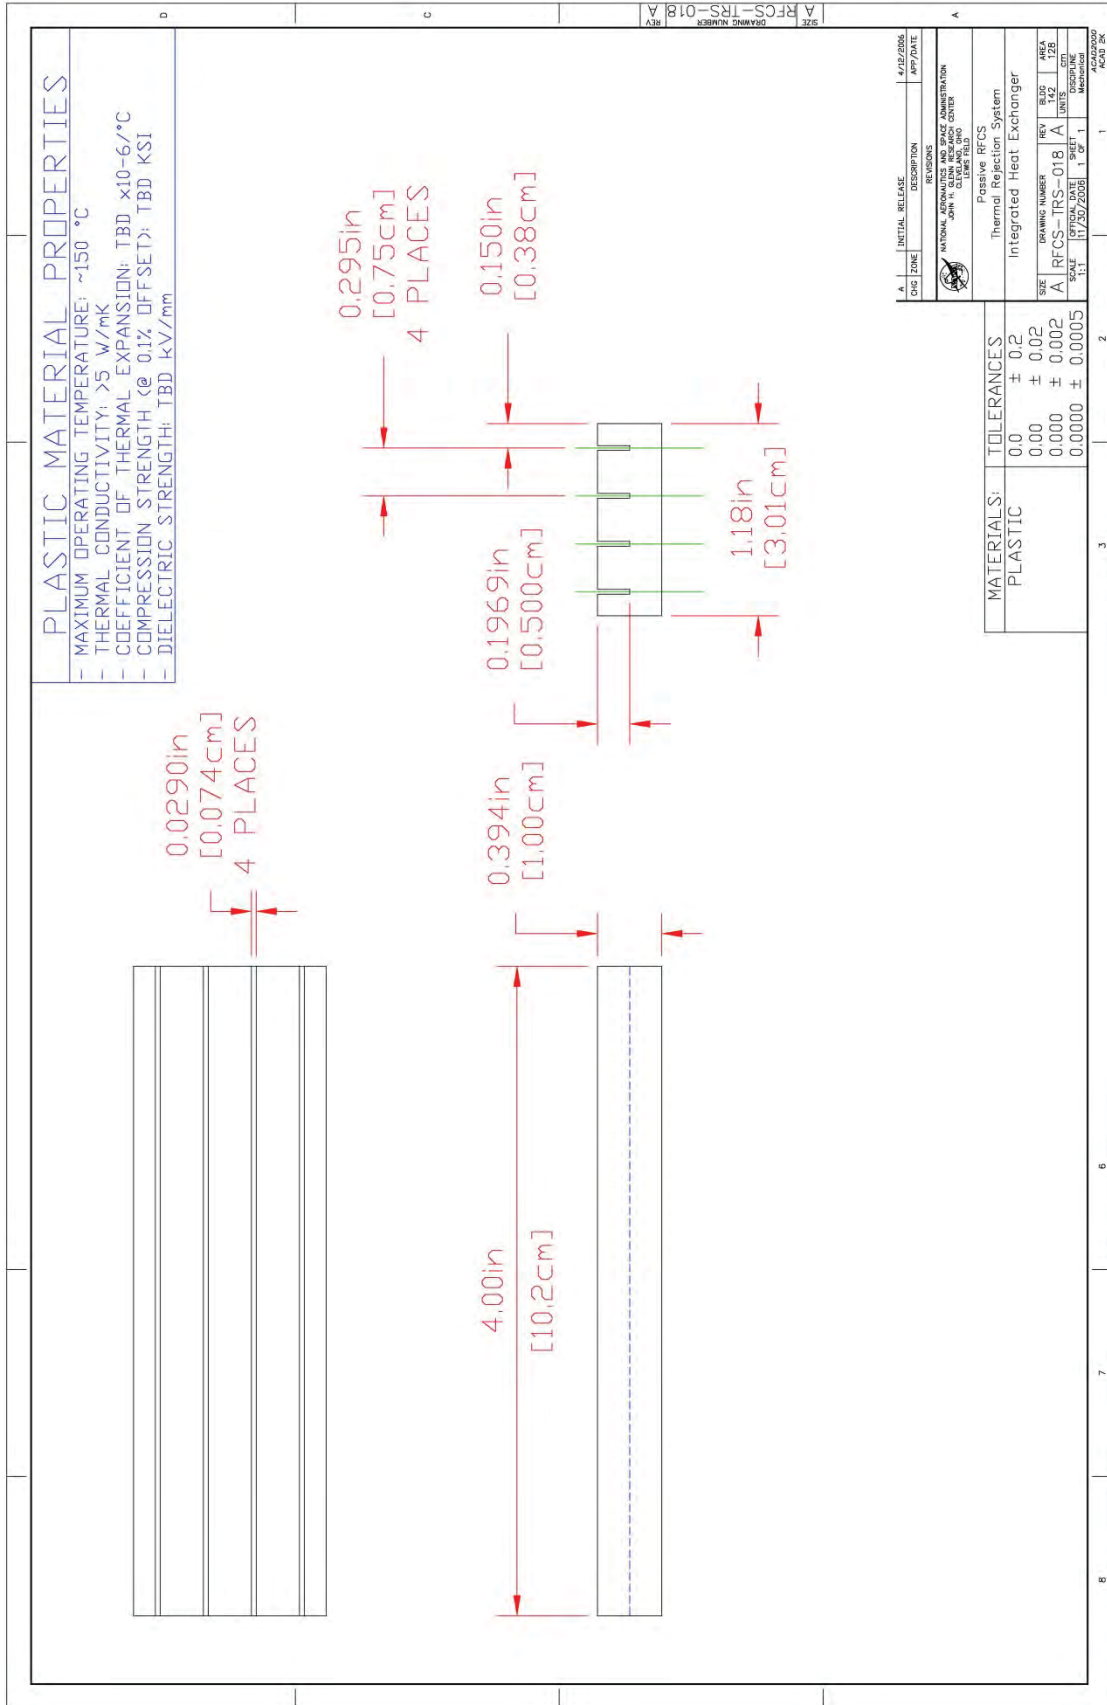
LCP Plastic Manifold Design Drawing for Use with TPG Cooling Plates
